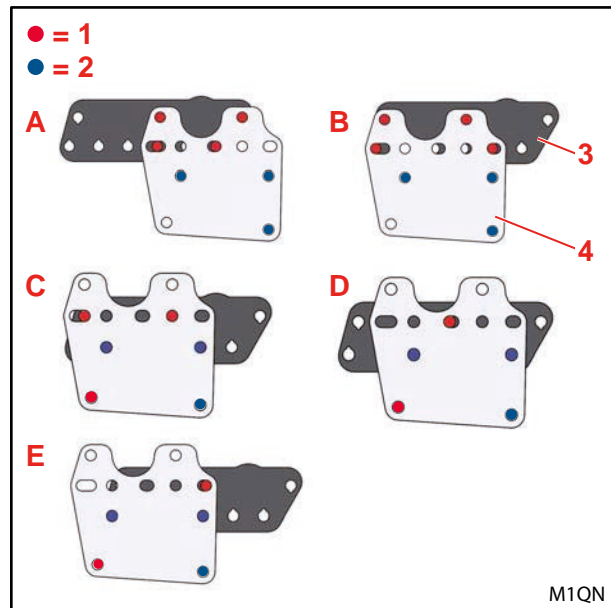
Installation positions of the valves on the bracket of the right mounting part
